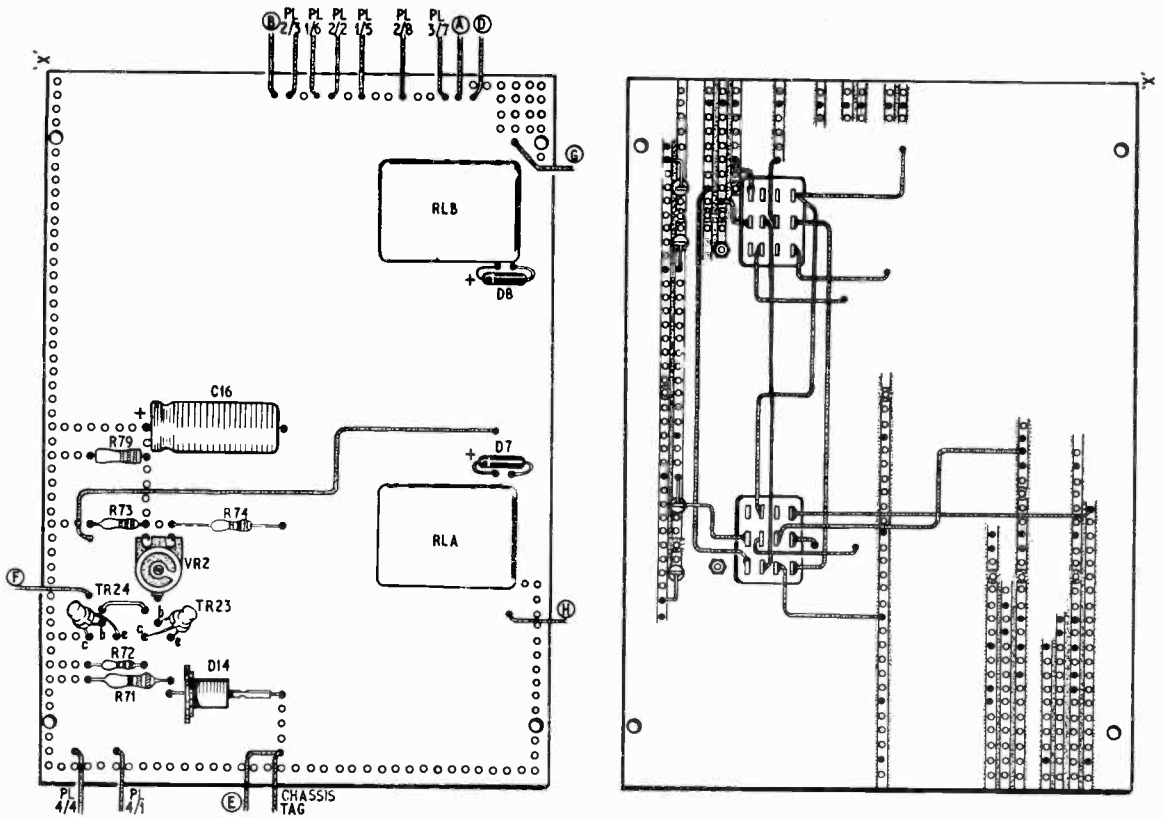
Relay and stabilised power supply board (P.S.U.2). Details of component mounting and relay interwiring are given
